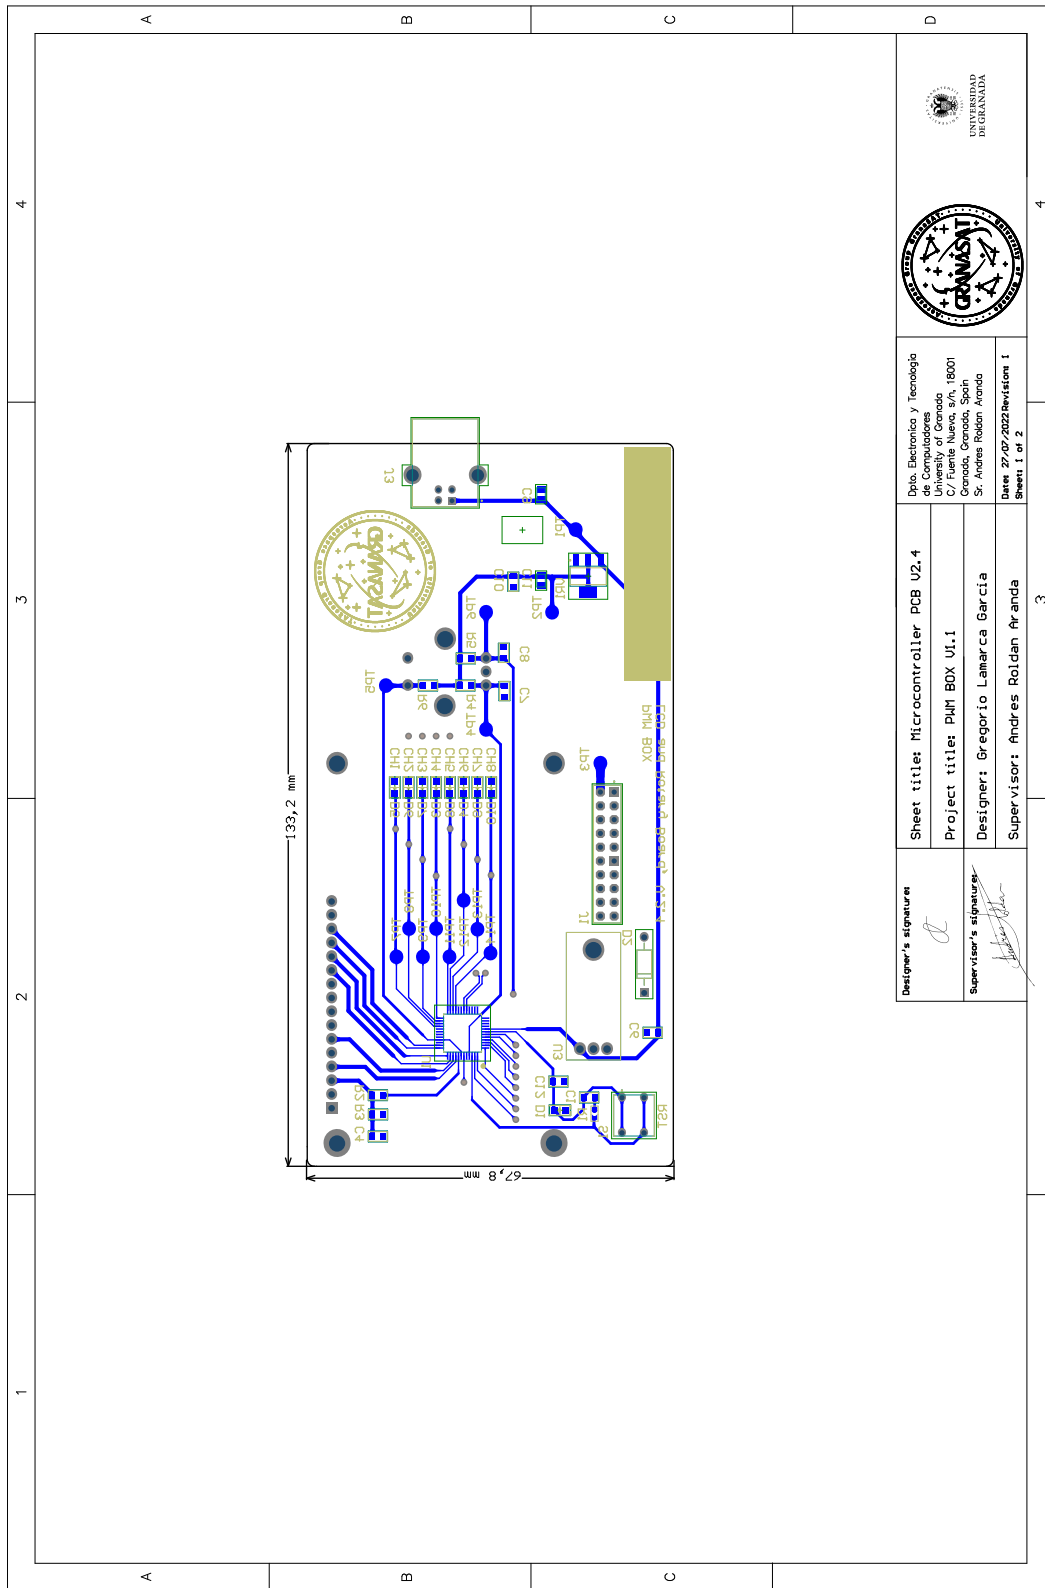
Bottom PCB prints in Microcontroller PCB project
